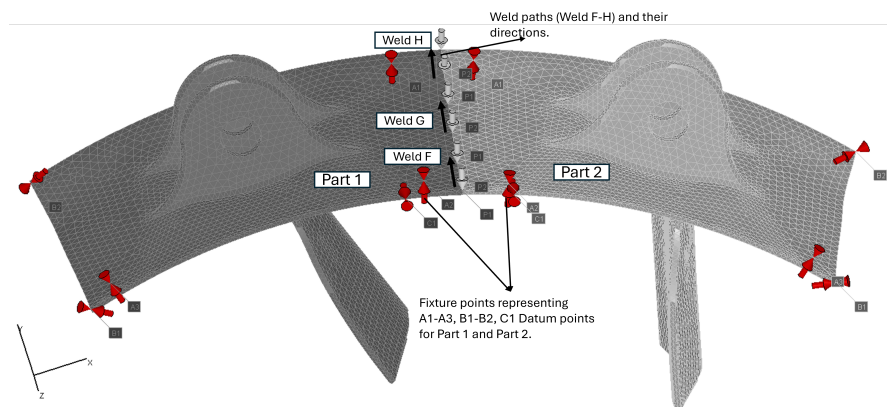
Assembly II—assembly of two INCONEL 718 metal parts with three weld segments F, G, and H.
